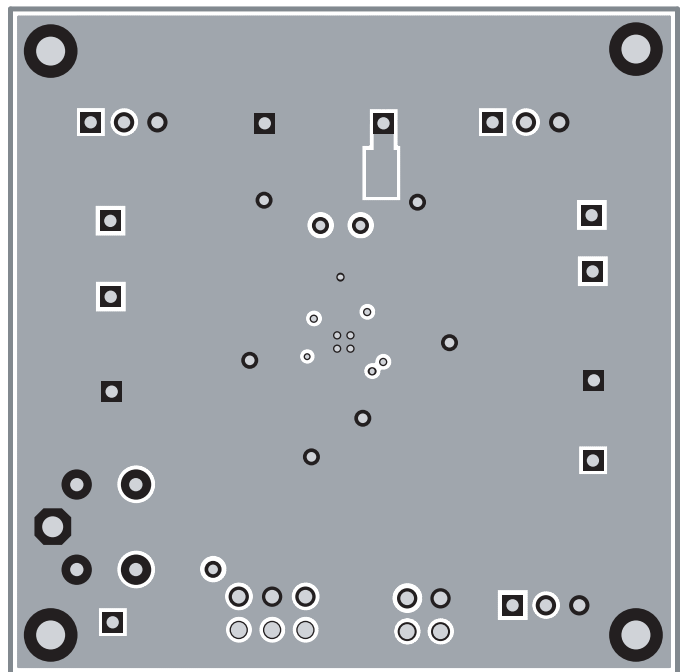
AAT2550 Evaluation Board Bottom Side Layout.
